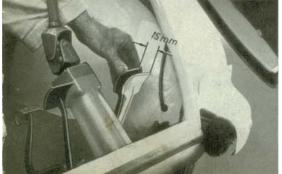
Adjustment of pedal clearance 30 as per M 4. (two open ended spanners 12 mm)
